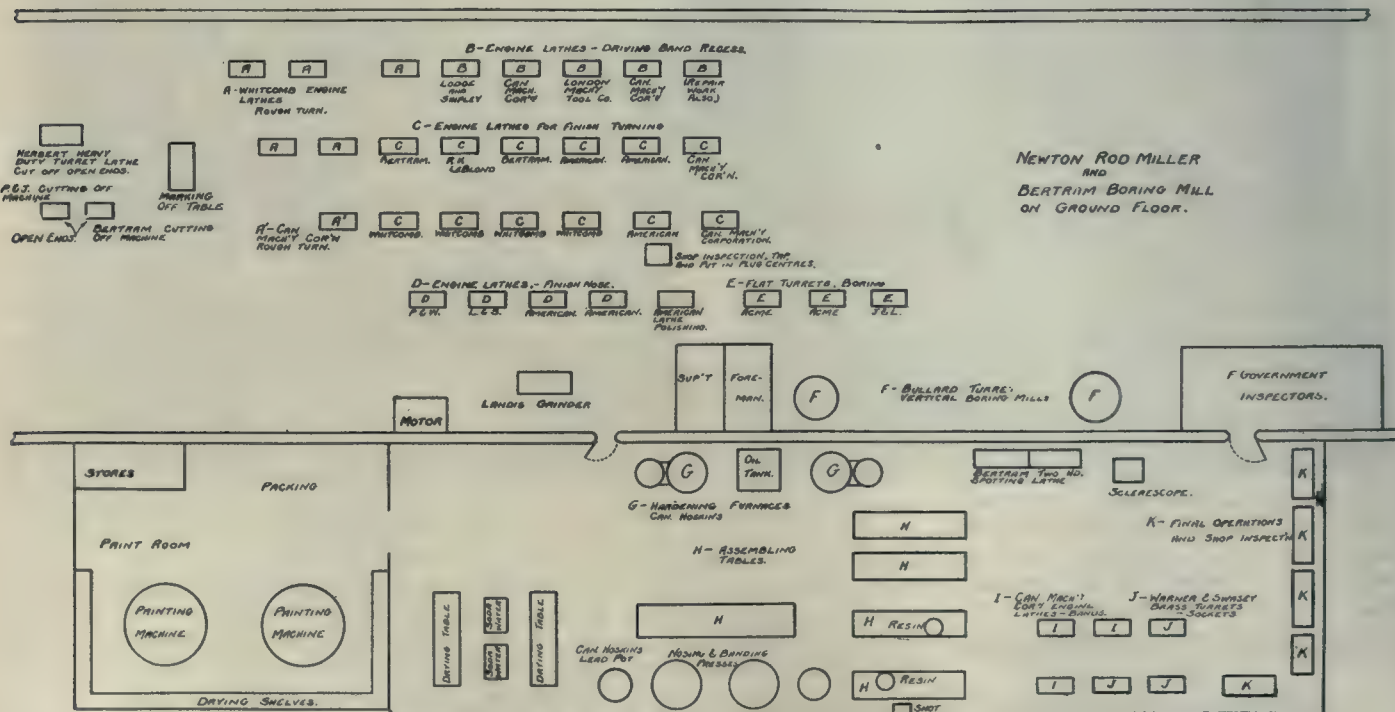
TOP—LAYOUT OF STEEL WORKING SHELL SHOP. FIG. 19. BOTTOM—LAYOUT OF HEATING, TREATING AND FINISHING DEPARTMENT.
